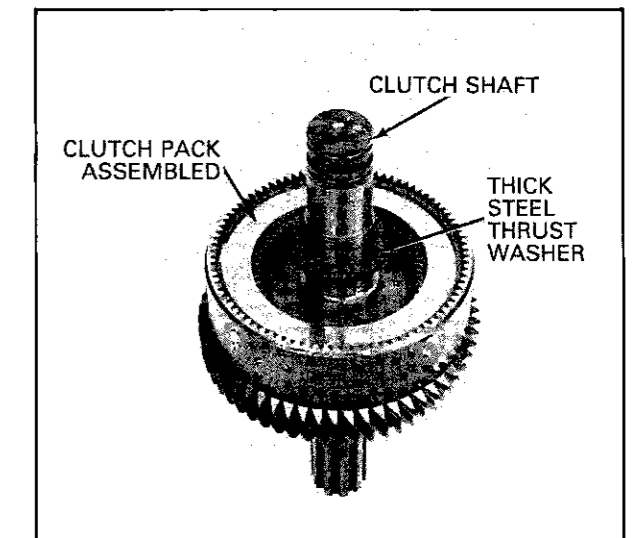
THRUST WASHER ON CLUTCH SHAFT INSTALLATION
